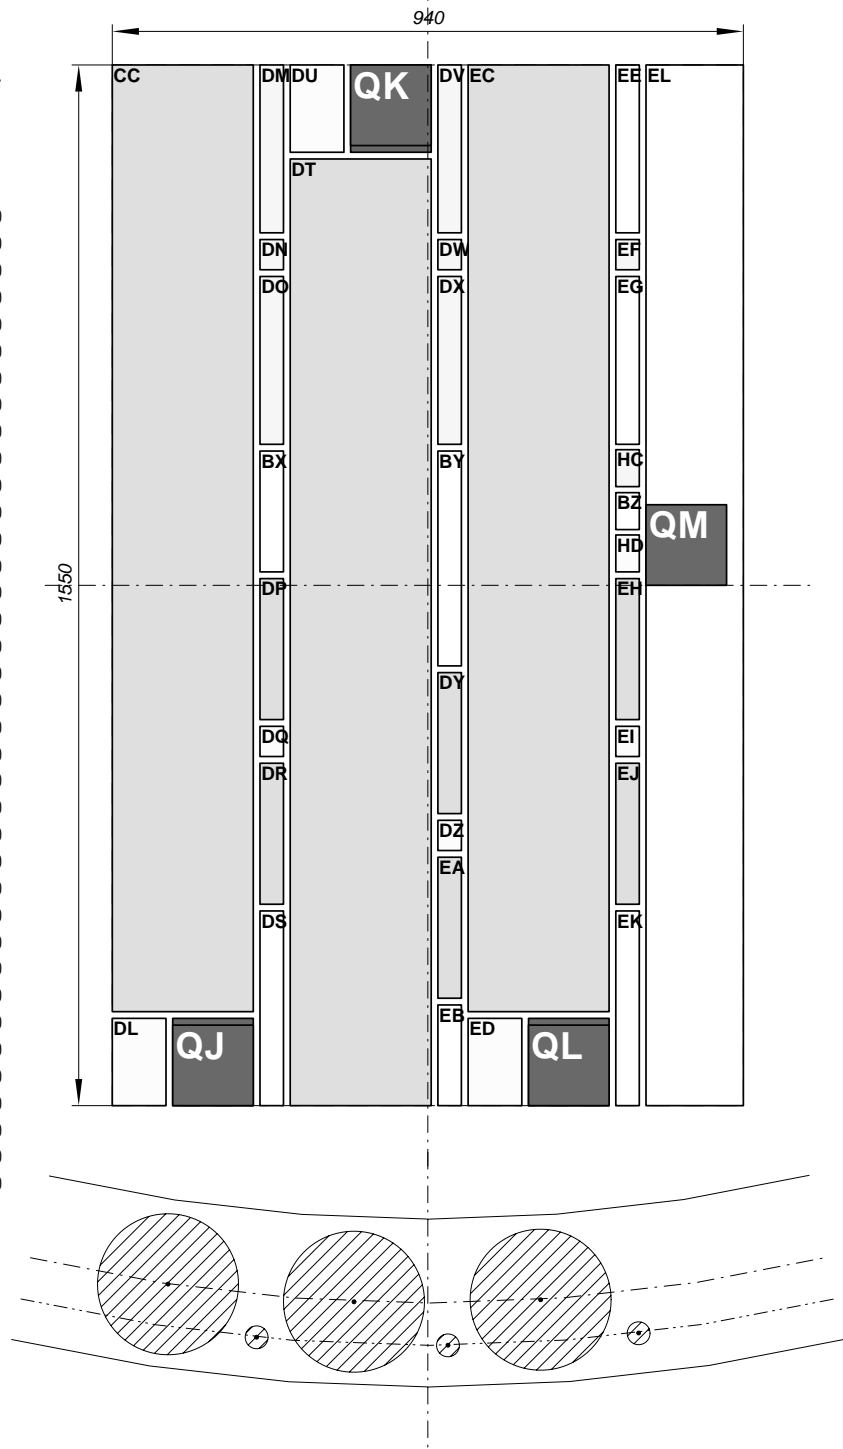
Segment 4 of the cylindrical section
